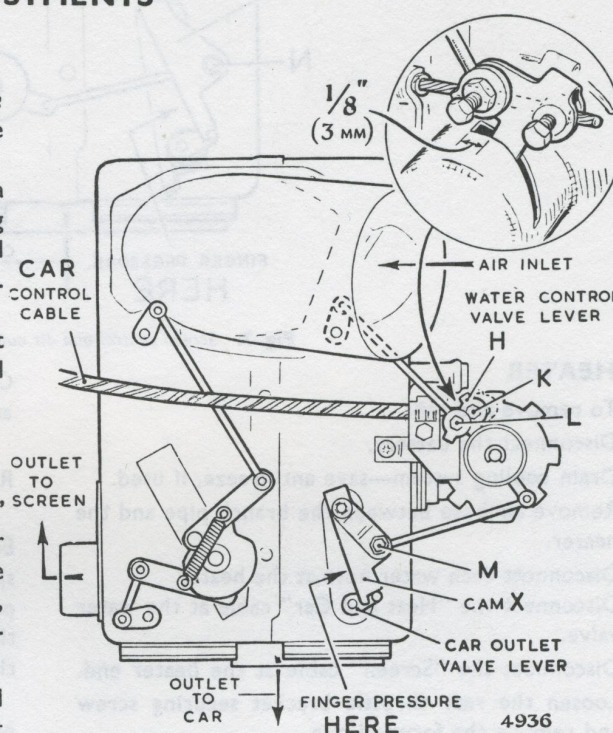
Car control, water valve, air mixing valve and air outlet valve adjustment details
